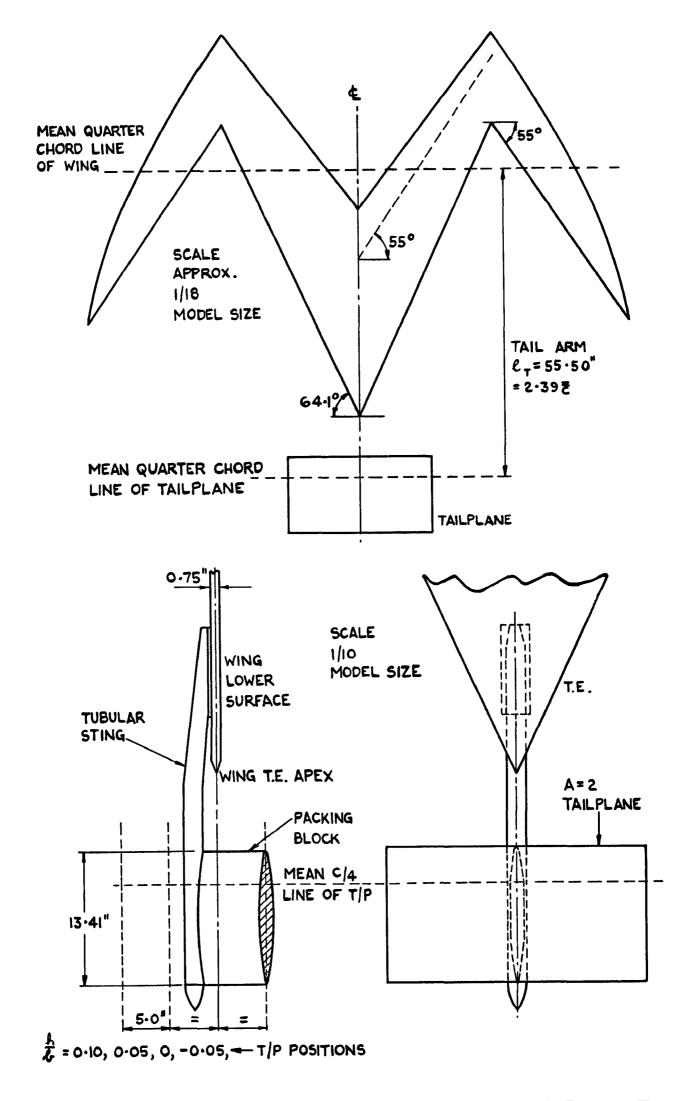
FIG.I G.A. OF M-WING AND TAILPLANE ASSEMBLY
